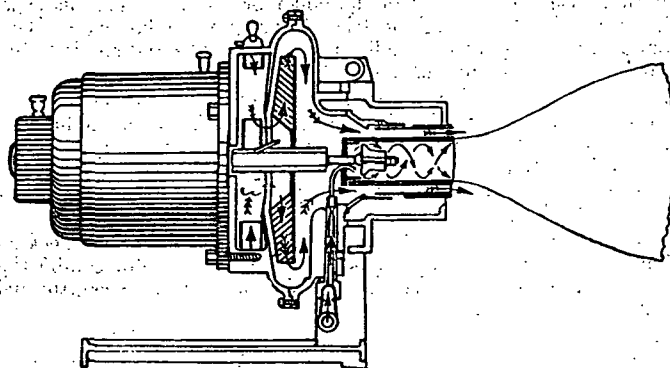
HORIZONTAL ROTATING CUP OIL BURNER
